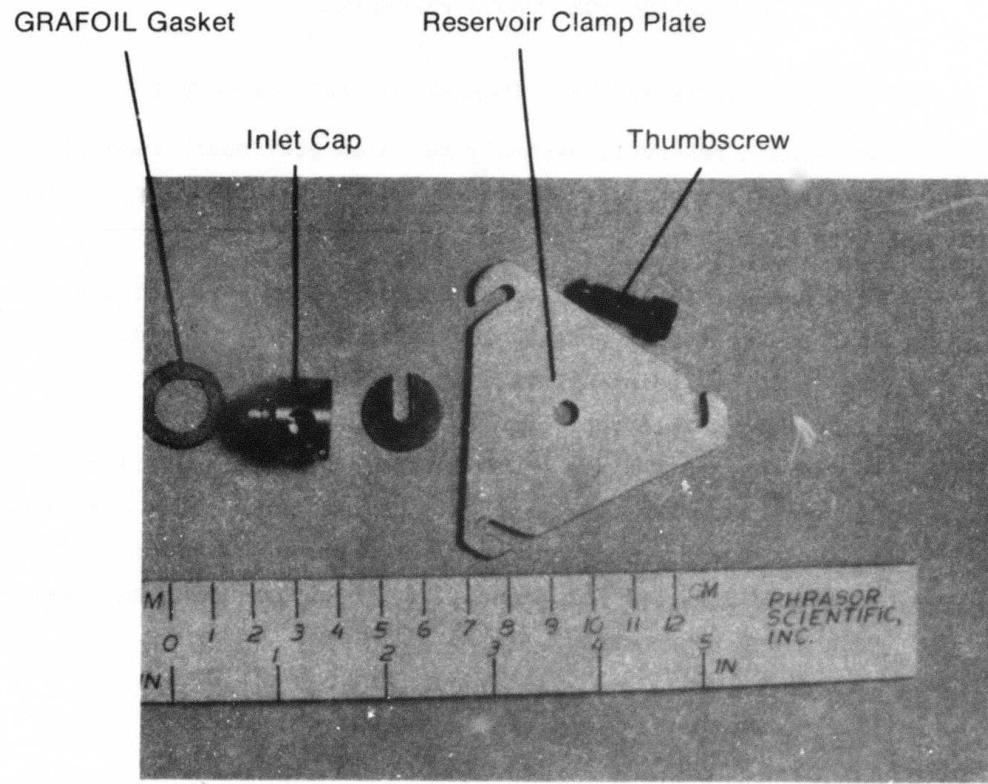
Gas Inlet and Reservoir Clamp Components
